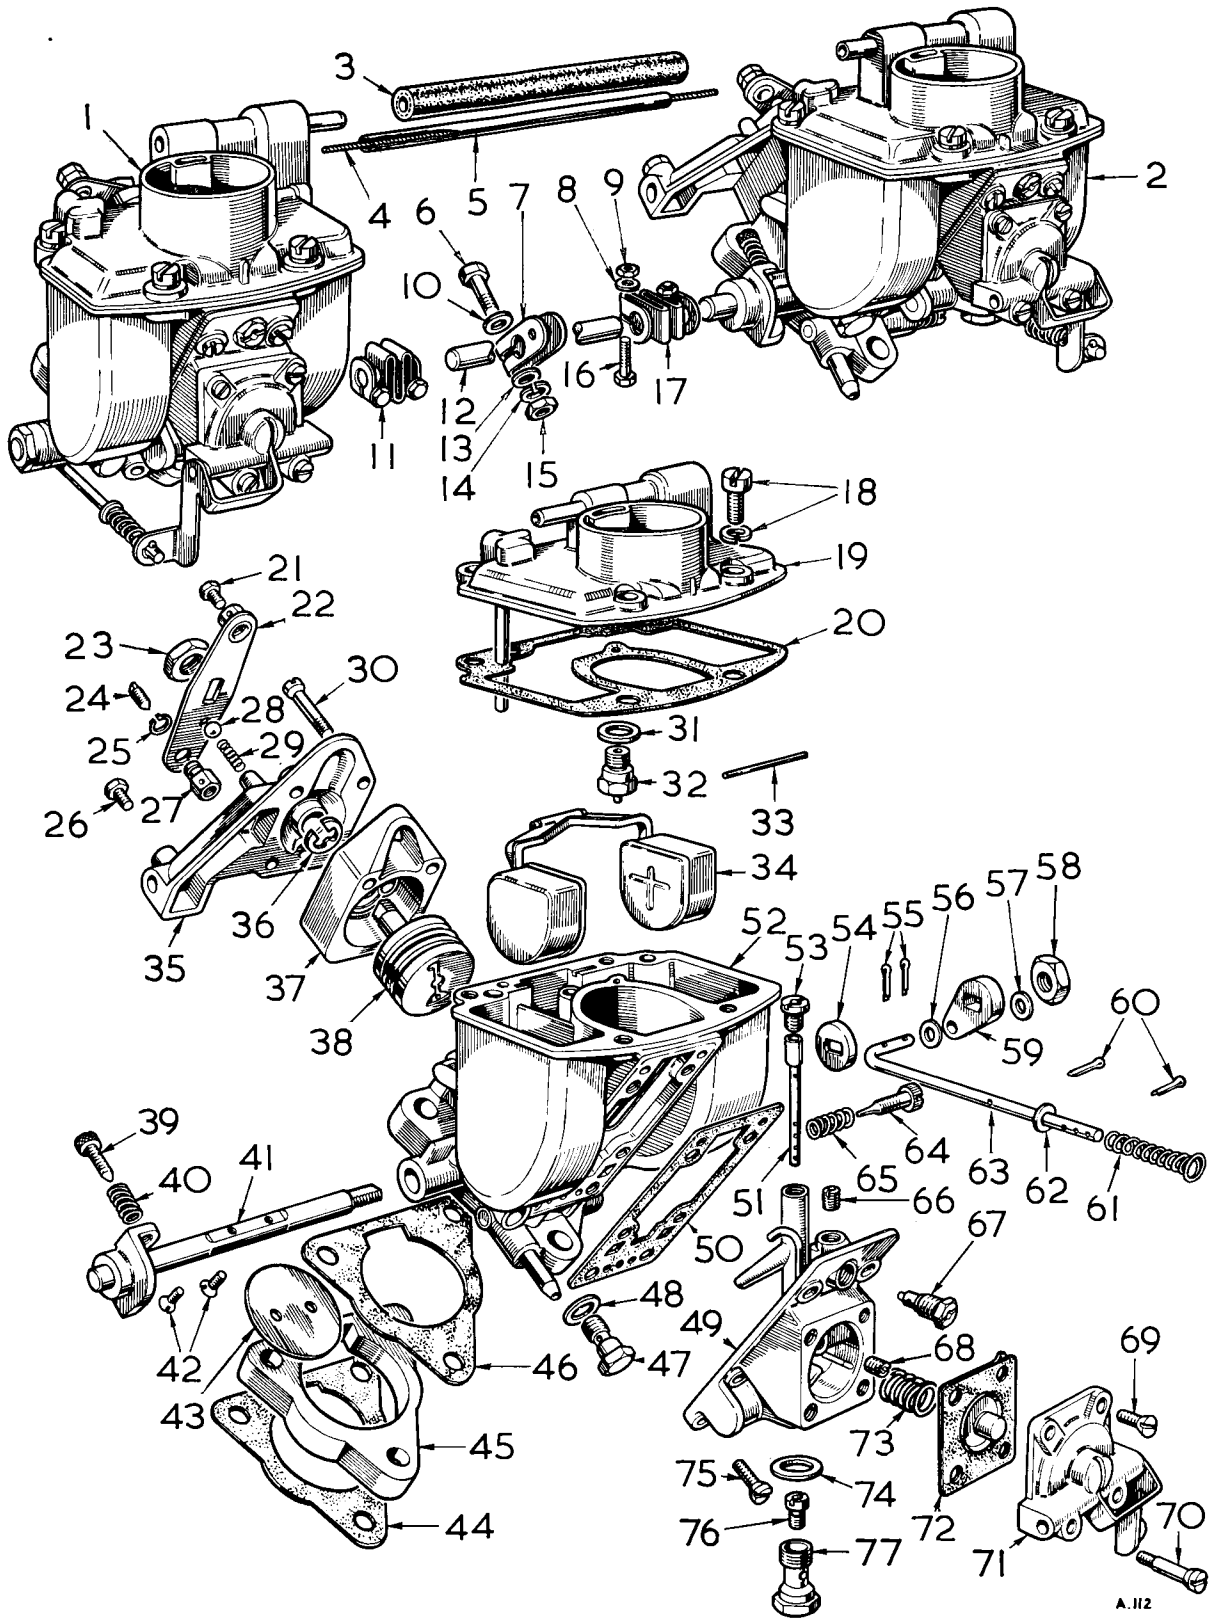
Exploded B32 P1H semi-downdraught carburettor
